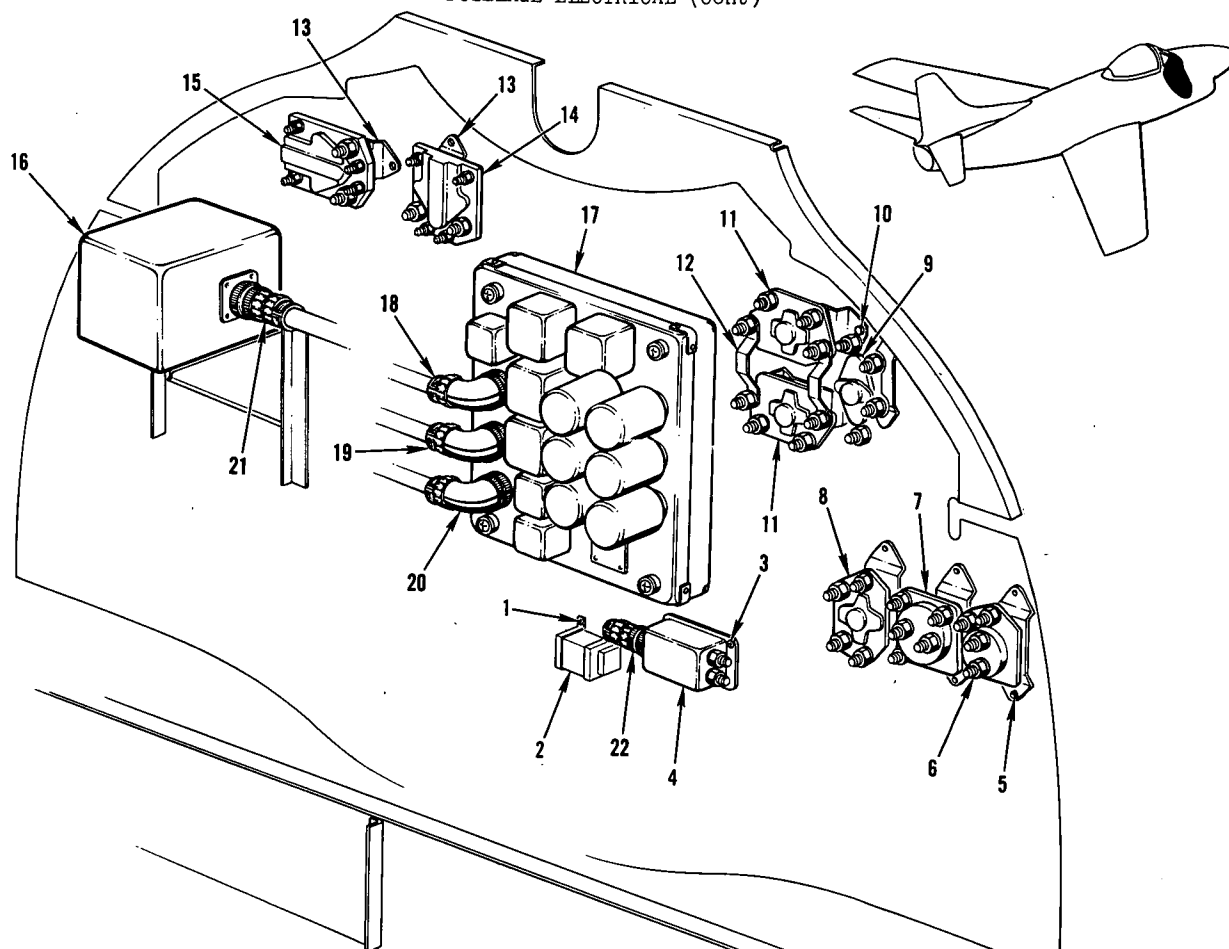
FUSELAGE STATION 45.5 BULKHEAD ELECTRICAL EQUIPMENT
